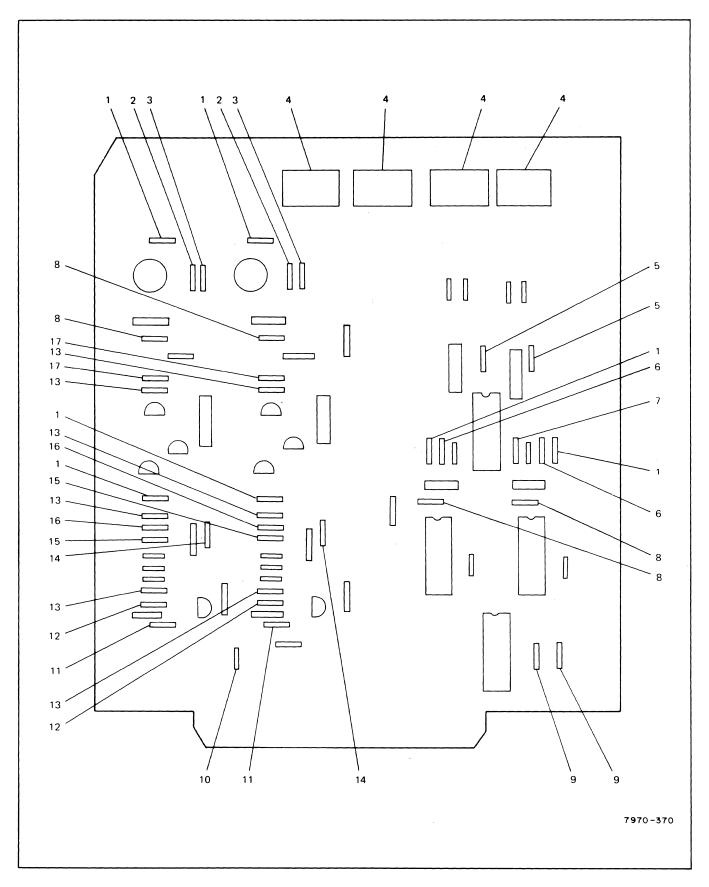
Dual-Channel Read Data PC Assembly (10 - 20.9 IPS) (Sheet 1 of 2)
